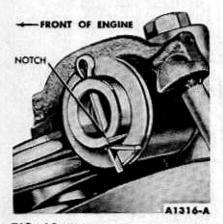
Valve Rocker Arm Shaft Identification Notch
